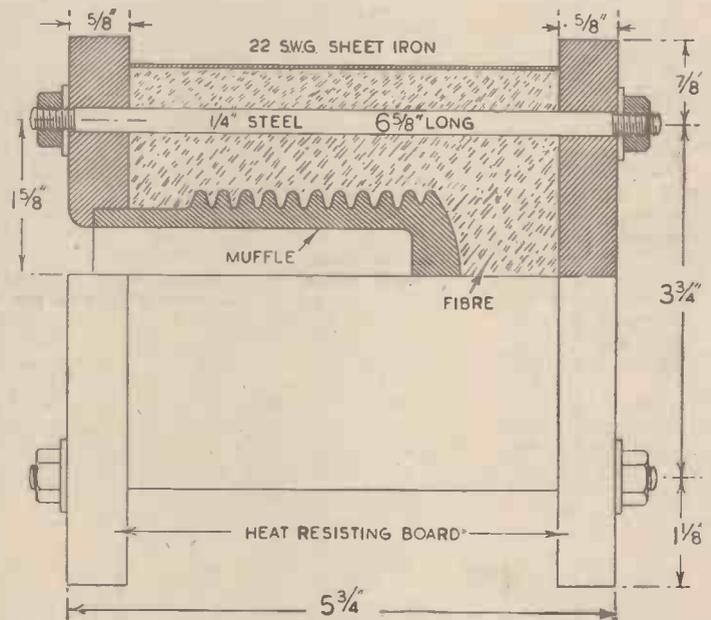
A side elevation in part section of a 200 watt electric furnace
